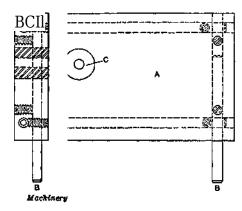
Toolmakers' Universal Drill Jig and simply be arranged to locate the guide bushings (in the case of a drill jig) in different positions; or the jig may be in the form of a special attachment for the drilling machine.
